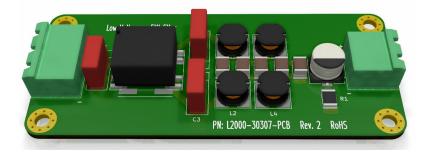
EMC filter assembled – using Wuerth common mode choke.
